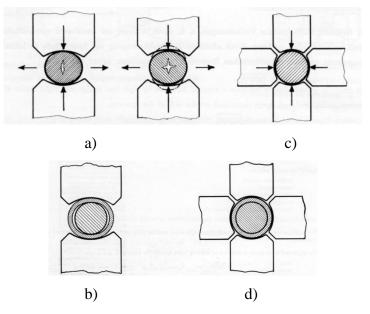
Forging of solid and hollow rods on a press (a, b) and on a radial forging machine (c, d)
